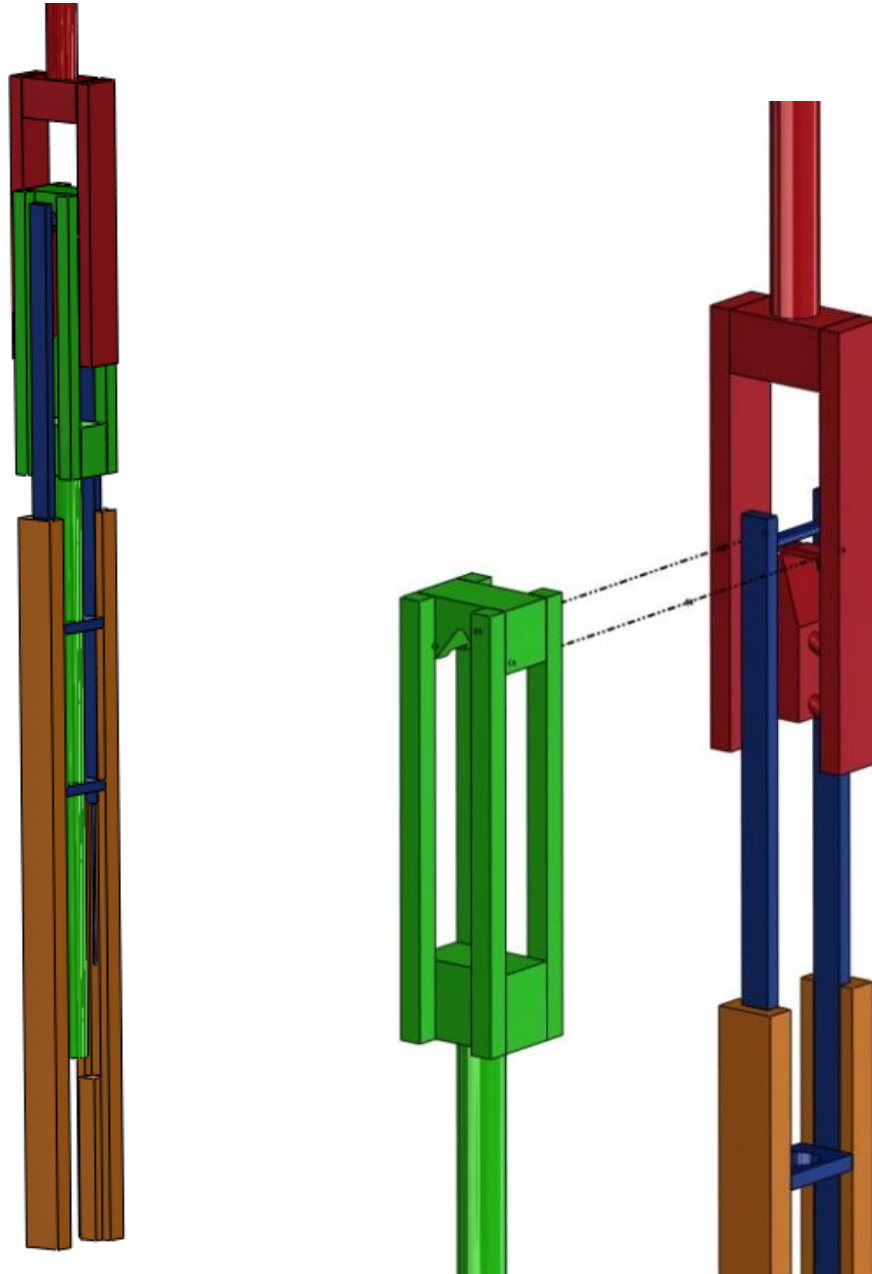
Completely assembled and semi-exploded view of bending fixture concept. The green subassembly is the mandrel, stationary. The red subassembly is the plunger, moves upward. The blue subassembly is the extensometer, measuring device. The orange subassembly is the extensometer guide. The largest diagonal width is 2.47 inches.
